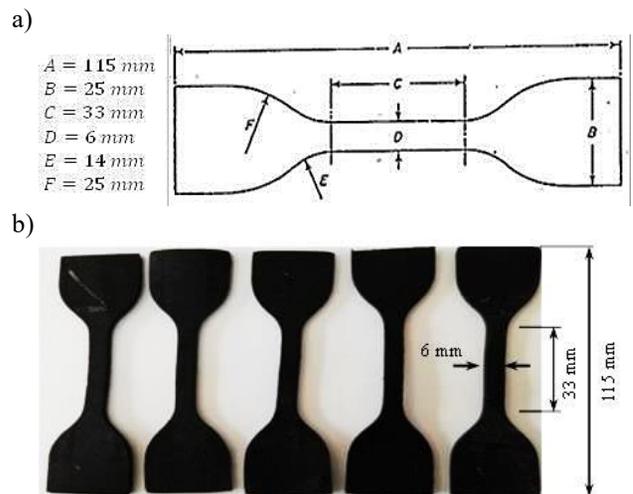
The tensile test specimen dimensions, specimen thickness, $t = 2 \text{ mm}$. a) standard ASTM D 412 [32], b) experimental tensile test specimen
